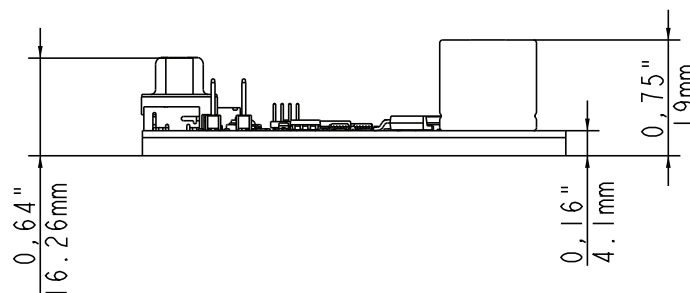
SDC2130/SDC2160 front view and dimensions
